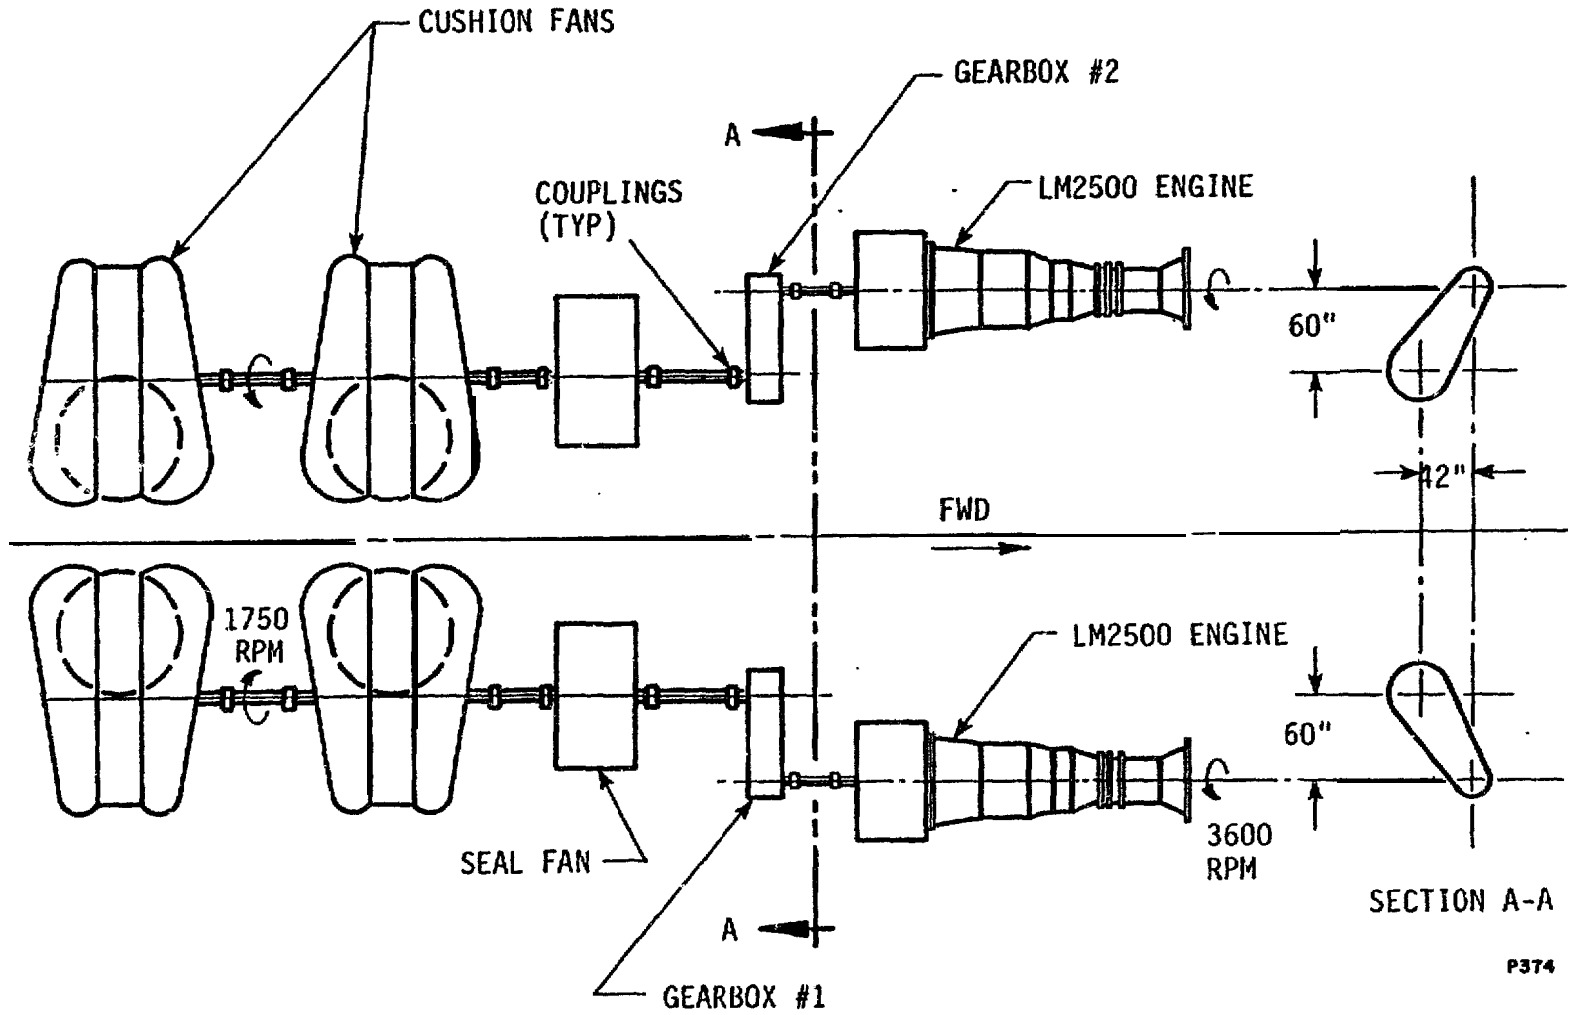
LIFT POWER AND FANS — PLAN VIEW
